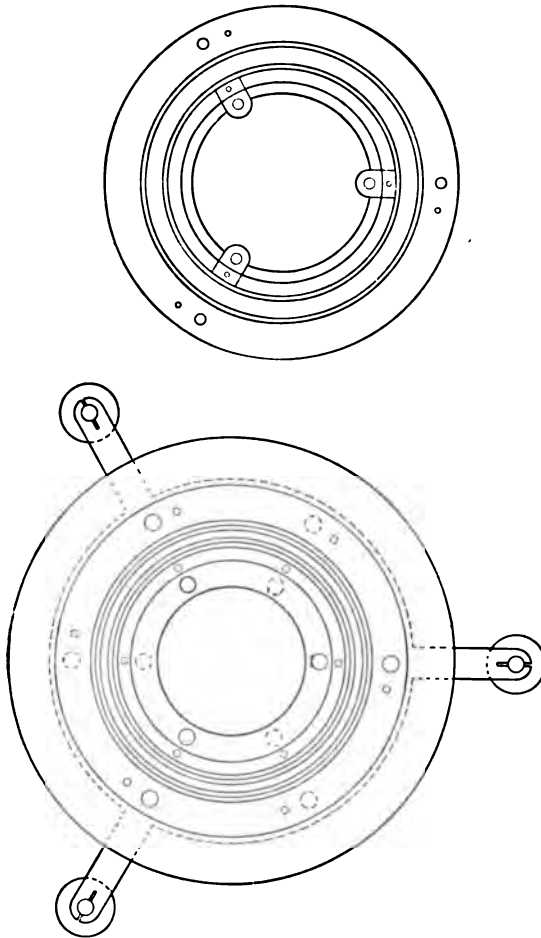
Plan of Base of Cylindrical Condenser, showing Method of Attachment of Cylinders.
